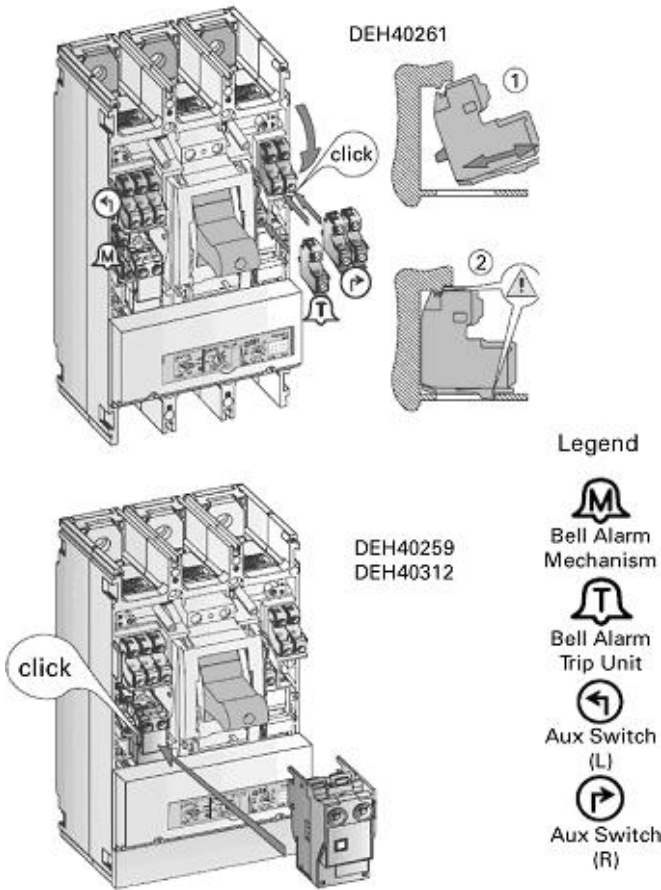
A. Installation of typical breaker accessories. See the Buylog® for details.
